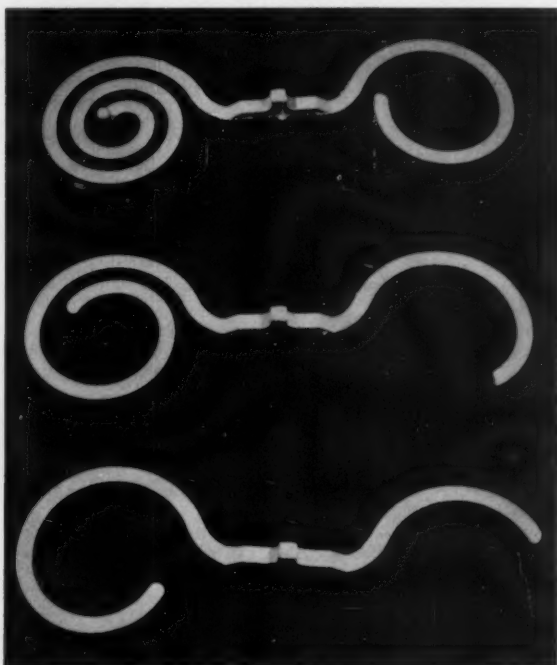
Double spiral fluidity test castings showing improvement in fluidity due to amorphous carbon. AZ91C alloy — left side coated, right side uncoated. Pouring temperatures (top to bottom) 1450 F, 1375 F and 1300 F.
